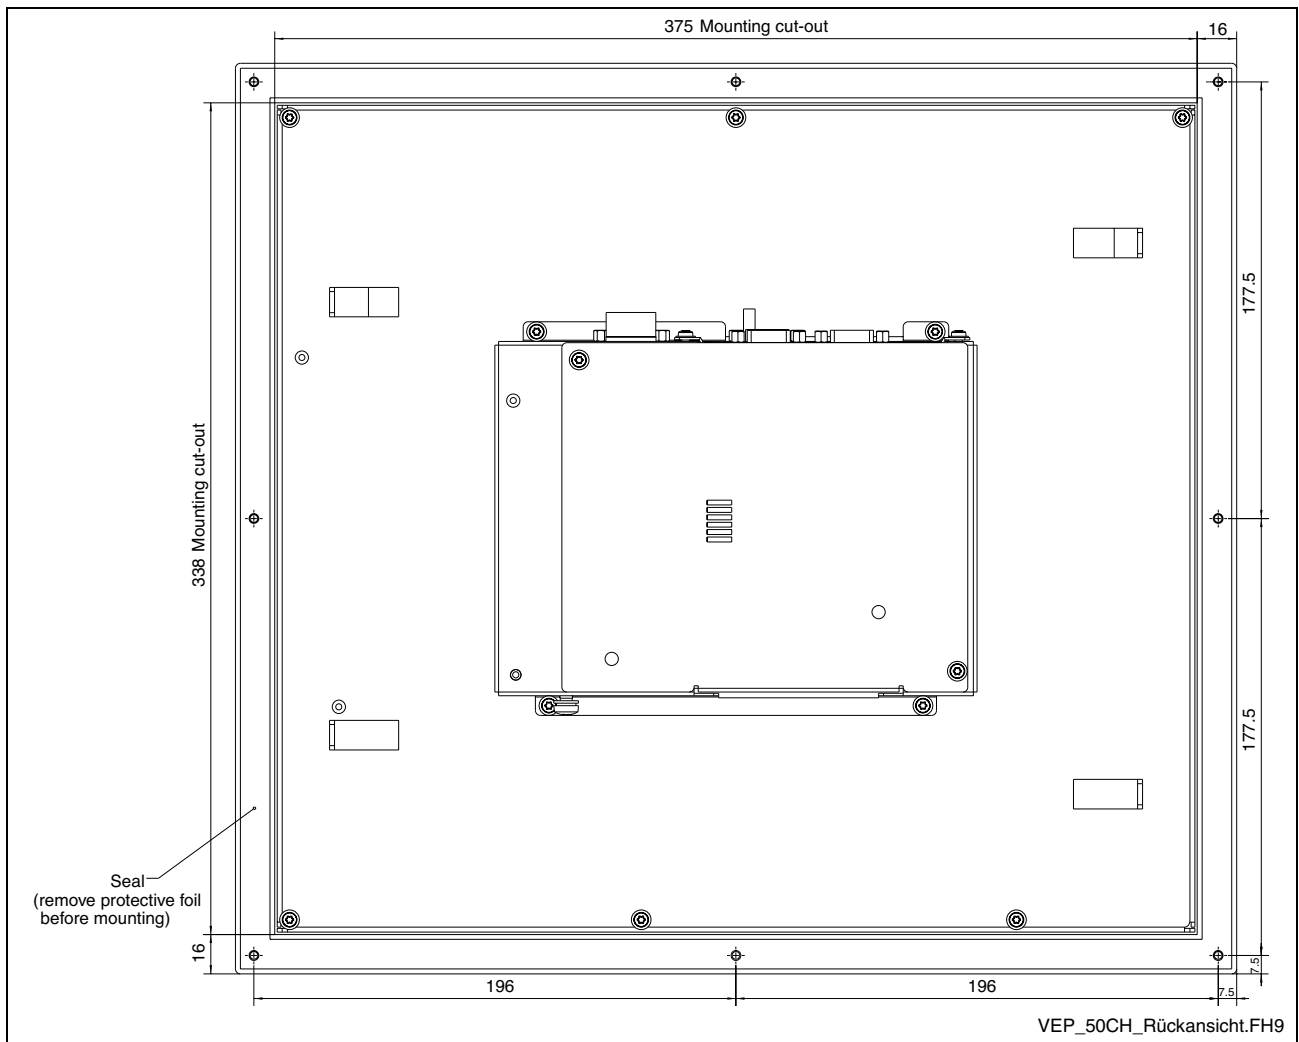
Mounting dimensions of the IndraControl VEP 50.1CH
